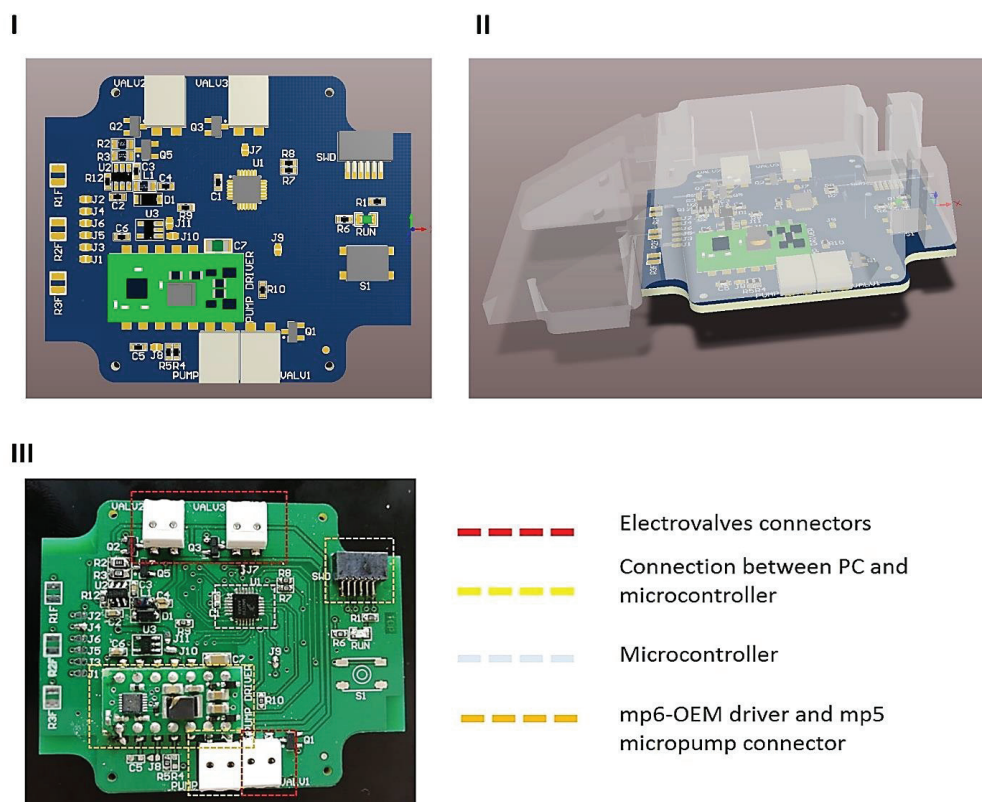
3D CAD of (I) electronic board and (II) automated sampling unit and PCB assembly. In (III) a picture of the PCB fabricated is shown.
